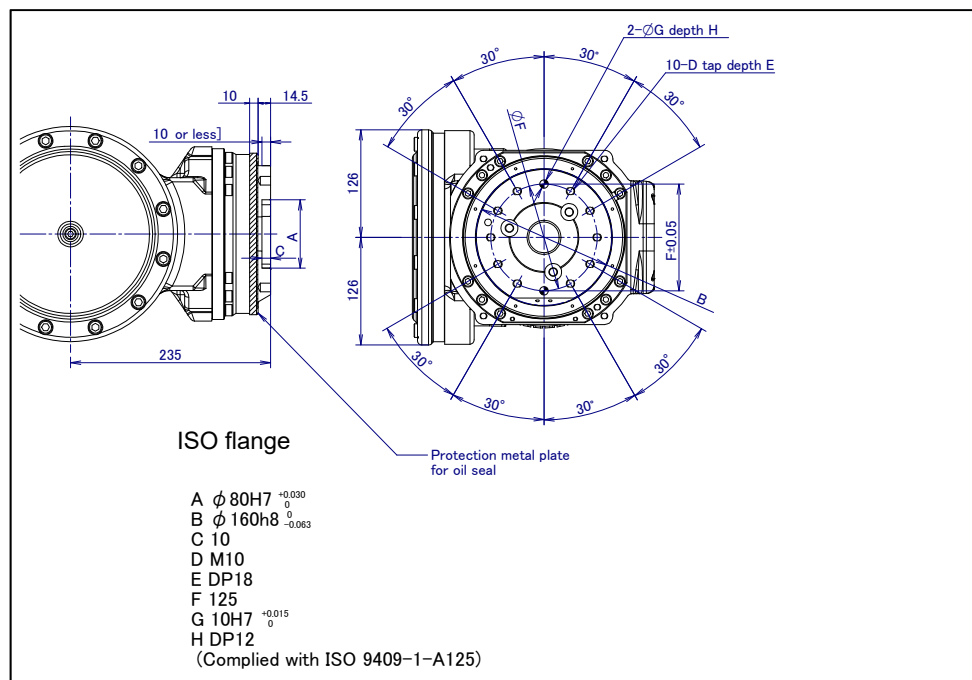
(e) End effector mounting face (ISO flange) (R-2000iB/210F/185L/250F/200R/100P/175L/220U)
